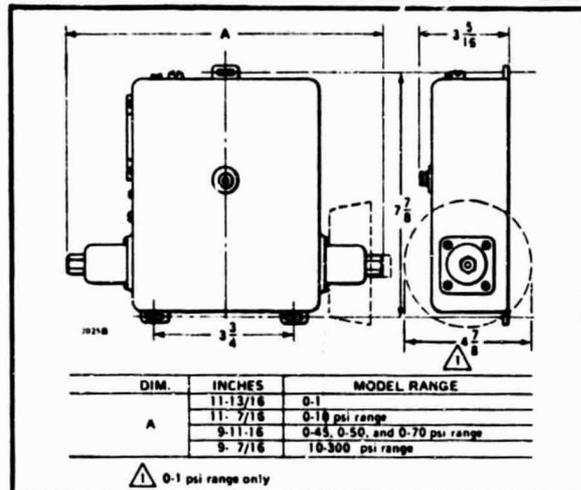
DIMENSIONS OF P406, P606, P906 (INCHES).
